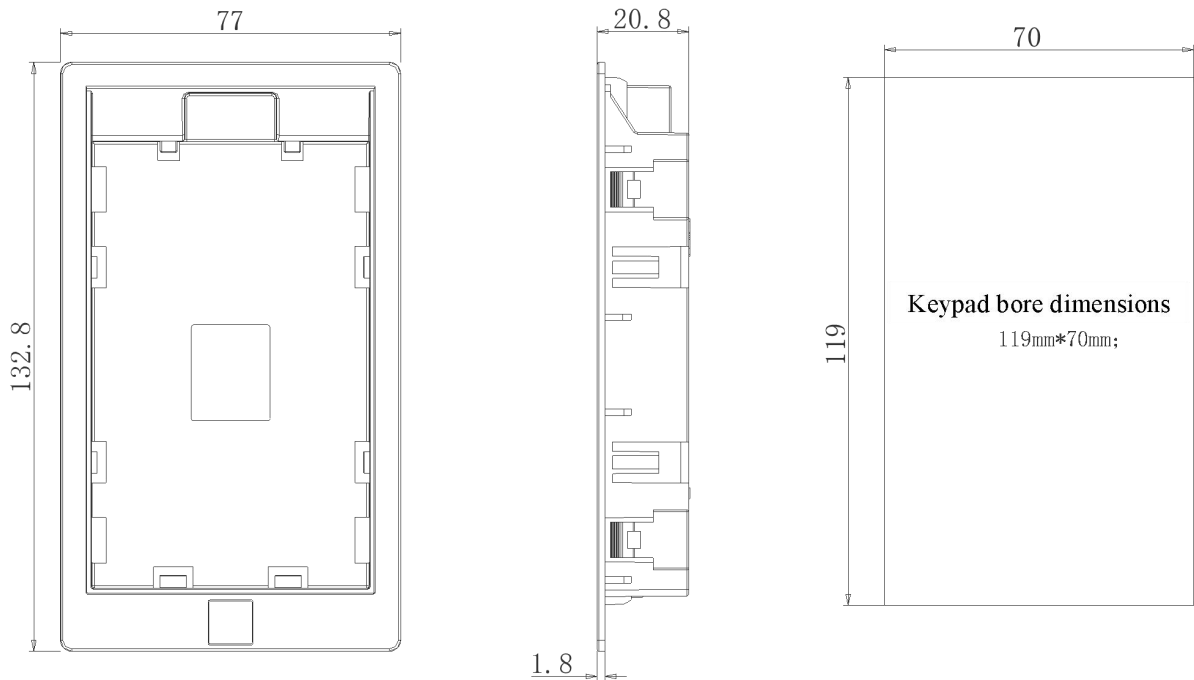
Outer Dimensions and Opening Dimensions of External Dual-line Keypad Pocket
